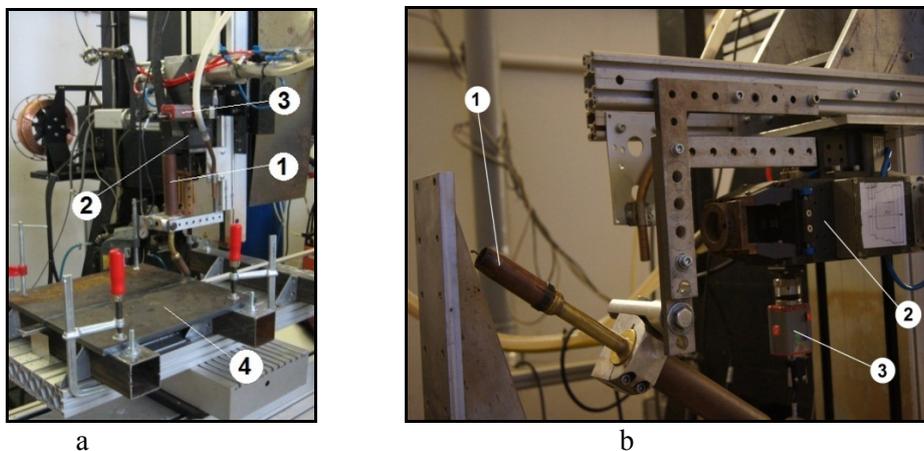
Location of the laser head and the torch at HLAW: a – PA welding position; b – PG welding position: 1 - torch, 2 - laser head, 3 - camera, 4 - weld samples.
